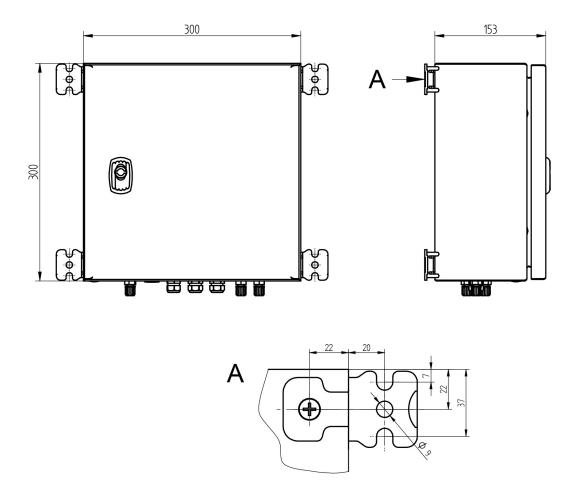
Dimensional drawing fully automatic calibration system in wall mounting housing
